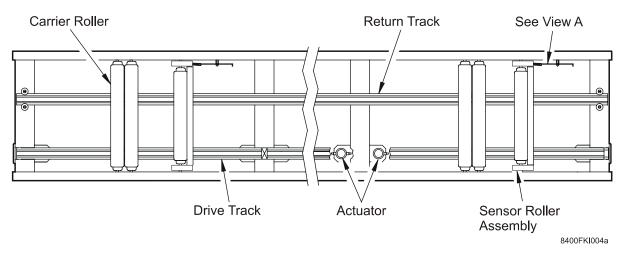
AG Accuglide Intermediate Straight Section (RH Assembly Shown)
